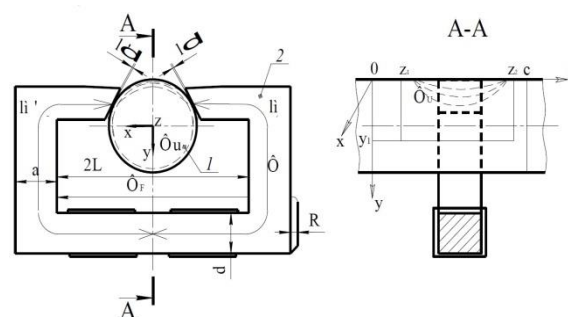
Diagram of the supply of a magnet to the surface of the part: 1 - details; 2 - electromagnet [10-12].
